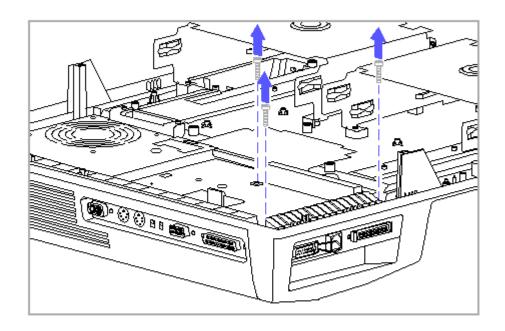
Removing the System Board/Battery Charging Compartment Screws
